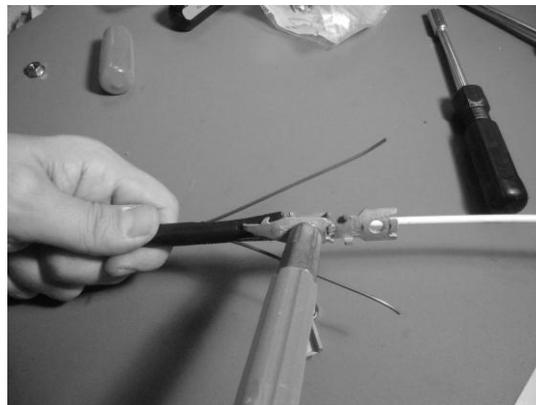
Assemble connector bottom, extension bracket, and connector top.
